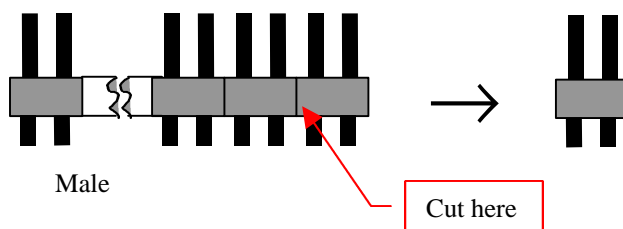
Cutting a two pin male header. Insert the short leads of the male header into the PCB and solder on underneath side of the board.
